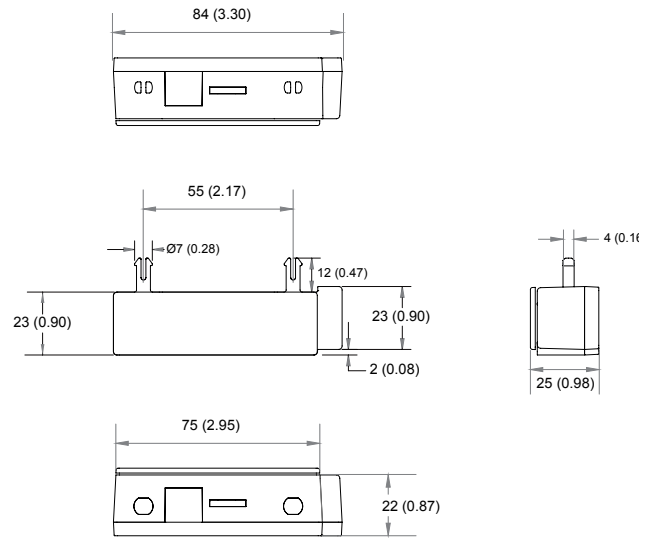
Q.RCU-D-L Light/Blind add-on modules - Front view and side view
